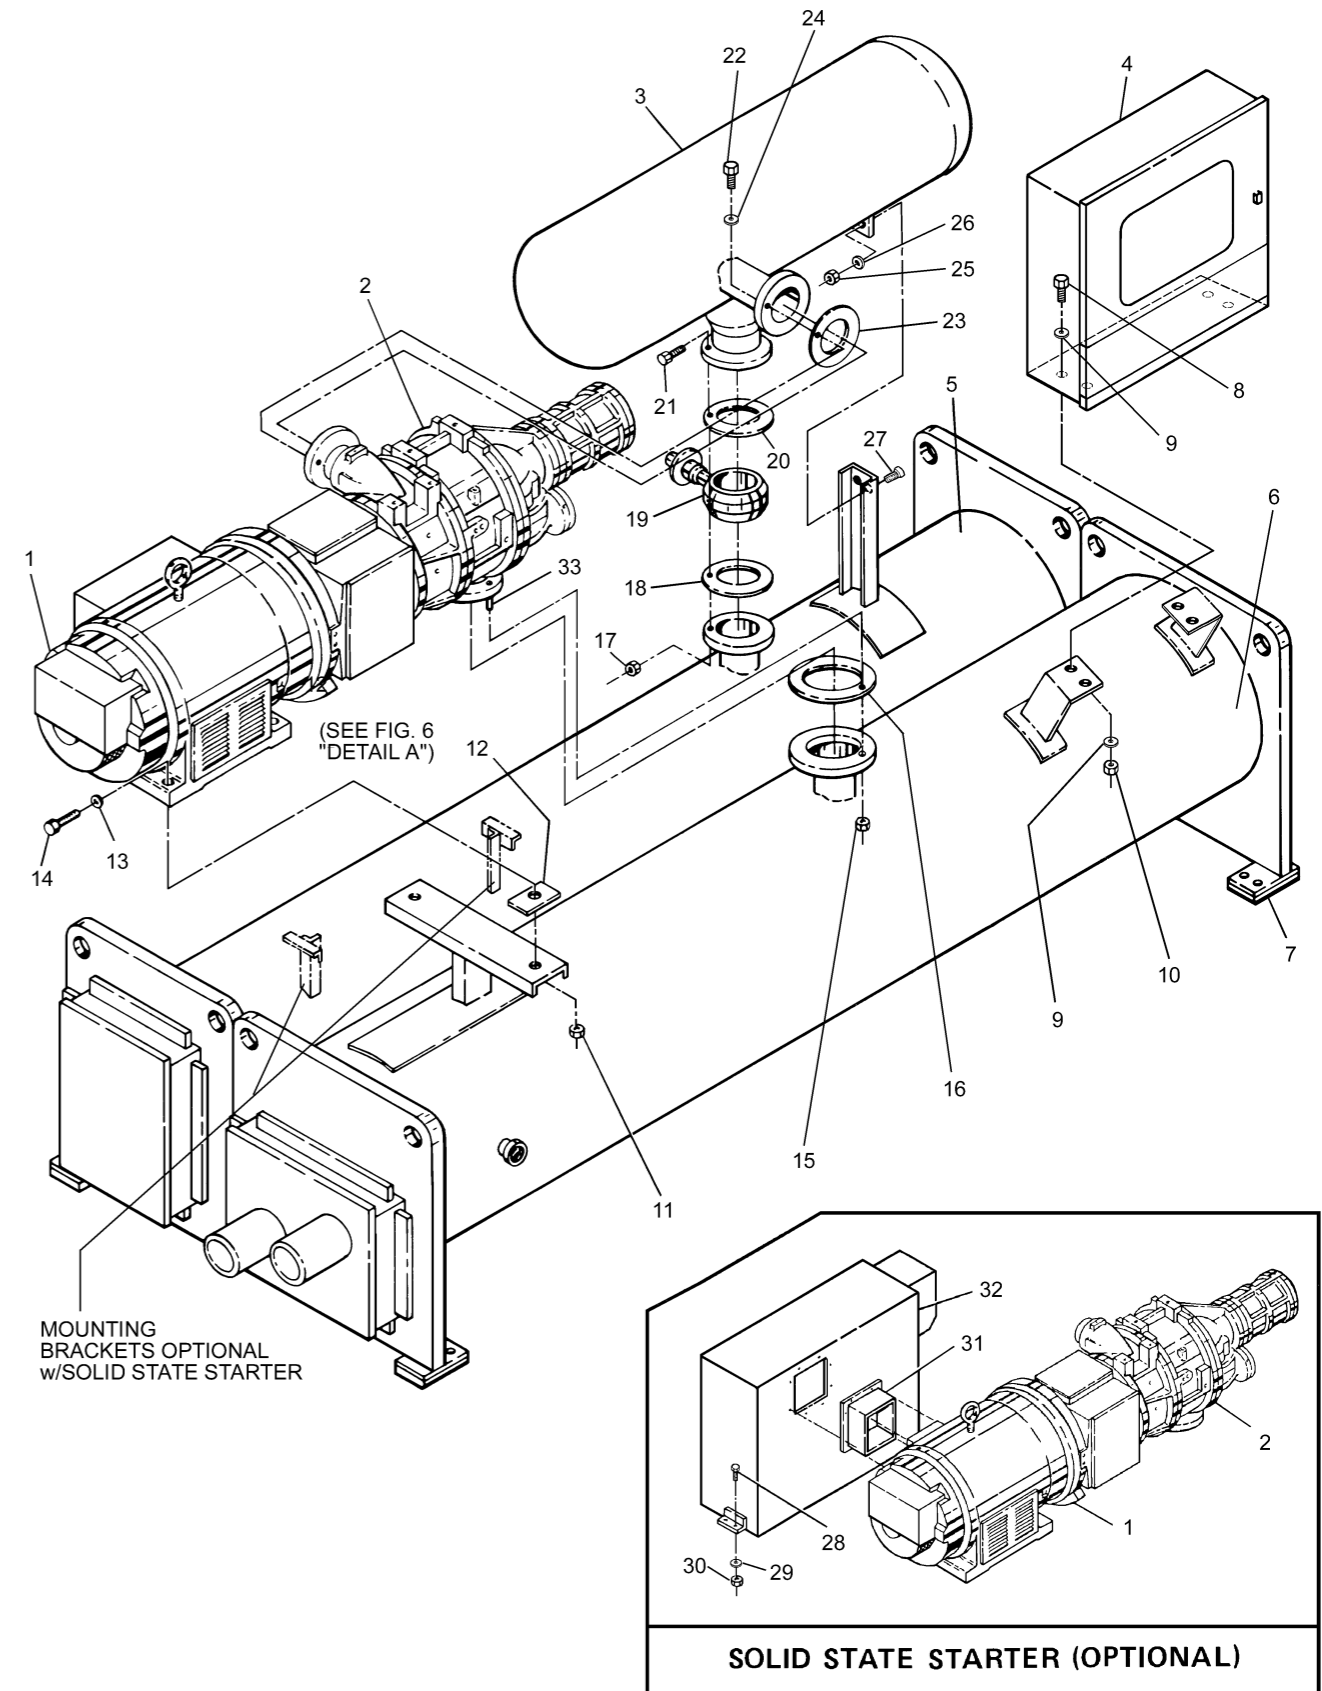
FIELD ASSEMBLY – EXPLODED VIEW – PARTS LEGEND
